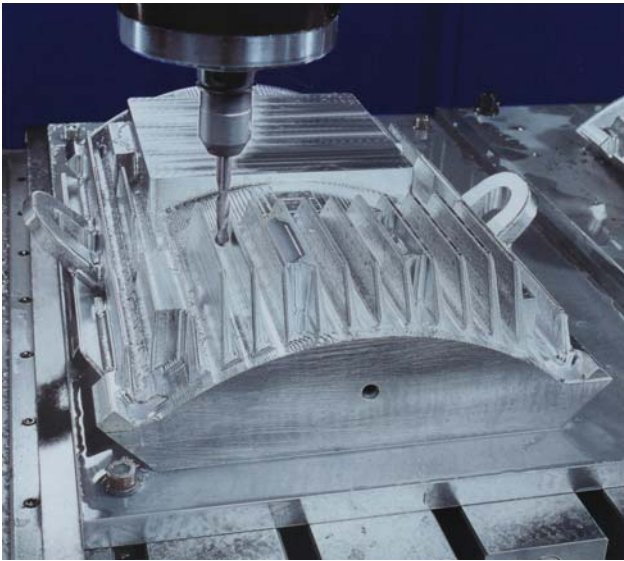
High-speed milling of an aluminium part /Mikromat/.
